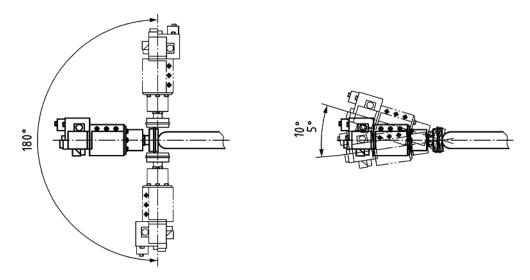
Example of types of oscillating spindles-holding beam for horizontal belt edge finishing machine with oscillation range of 180° (A) and with maximum oscillation range of 5°-10° (B)
